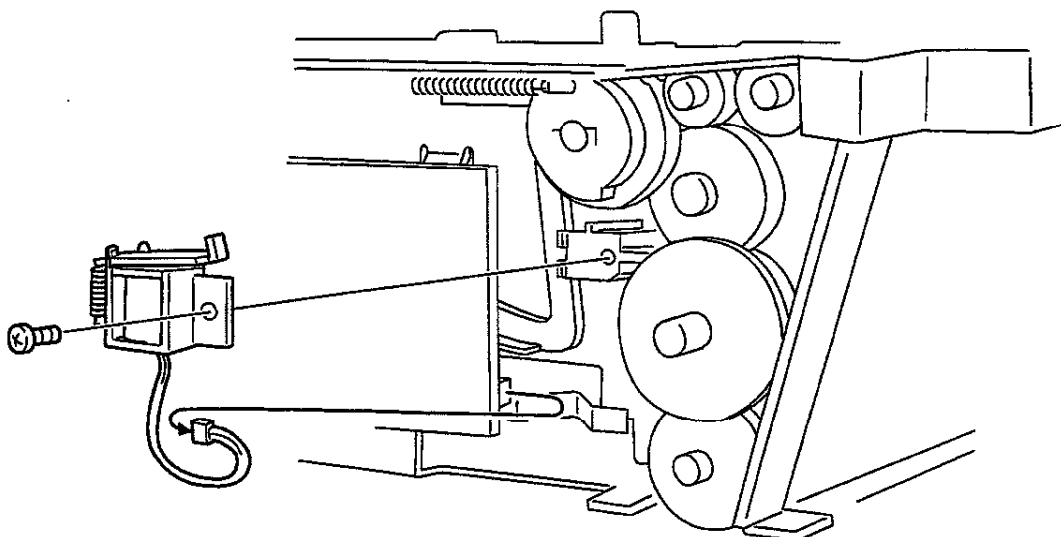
Removing the 500 Solenoid Assembly
